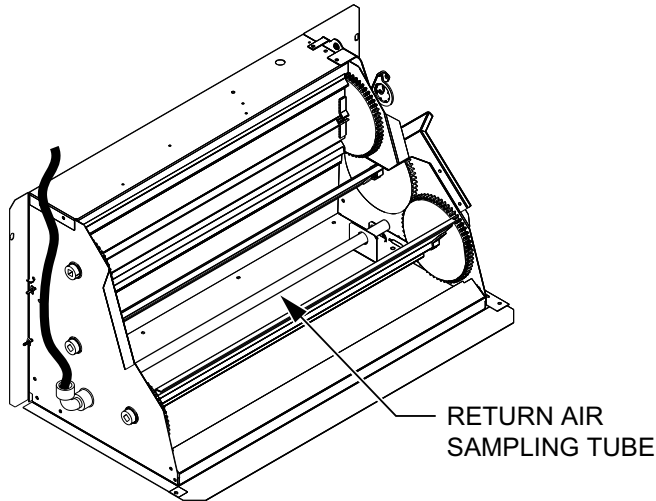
Return Air Sampling Tube Location (View reoriented to show opposite side for clarity.)
